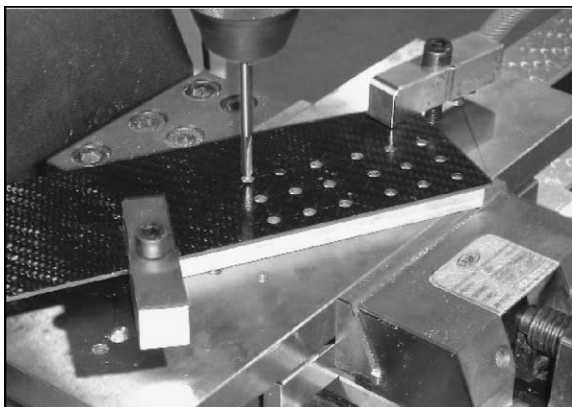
Squeeze of the plate in the press of jaw of the drilling machine.
